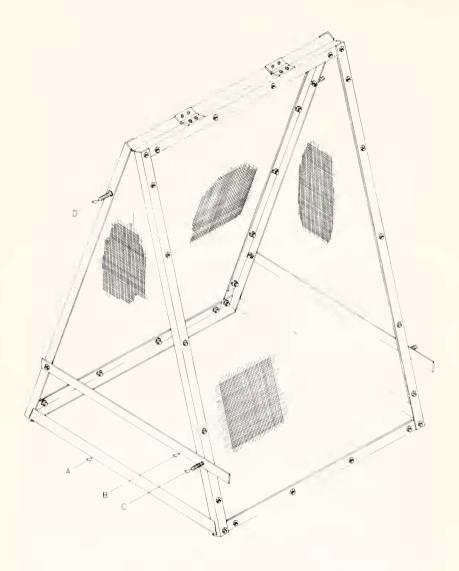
Isometric projection diagram of the emergence trap showing construction details. A, rubber tape reinforcing folding side of net; B, aluminum strip used to keep trap open; C, bolt used to secure aluminum strip with trap open; D, bolt used to immobilize aluminum strip with trap closed.
